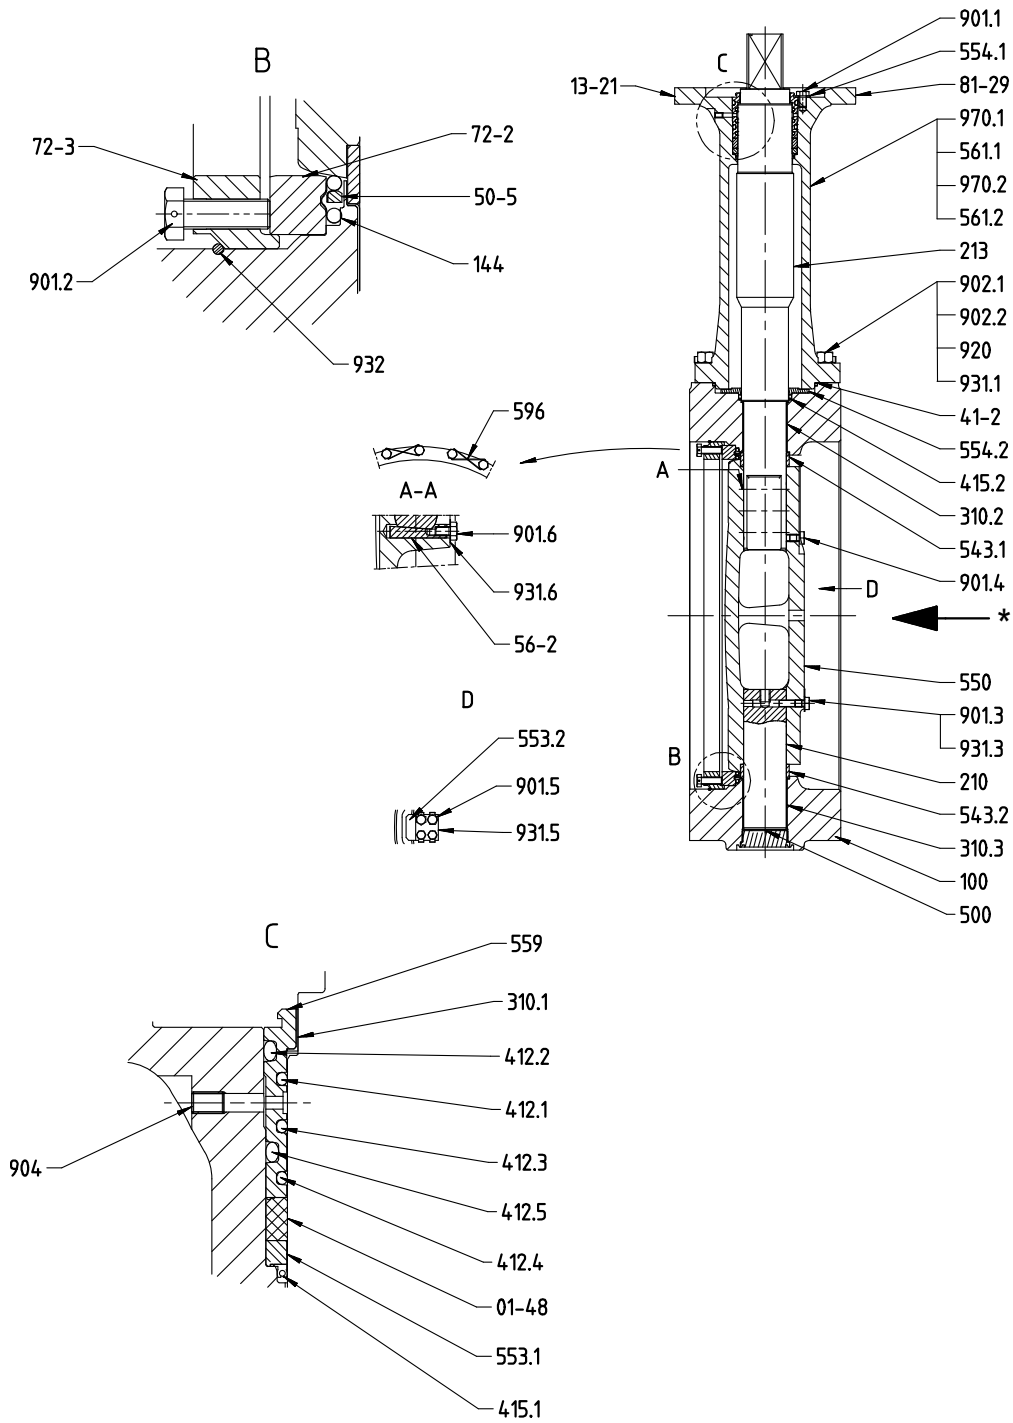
Sectional drawing of DANAIS CRYO T7 - DN 650-1400 (26-56 in.)
